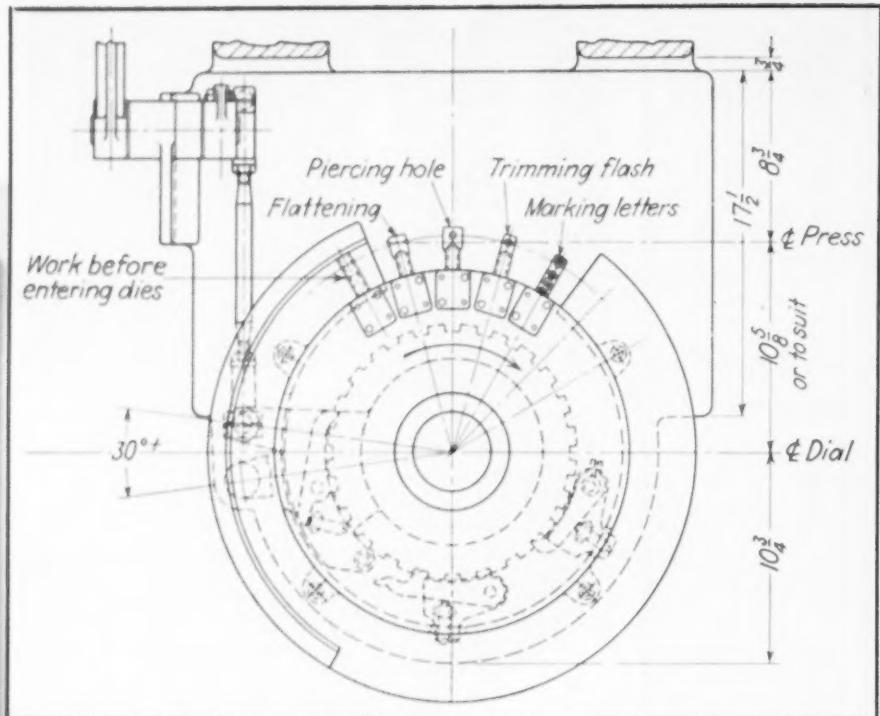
Drawing of typical underfed dial showing necessary dimensions for mounting on Niagara No. A 3/16 press. Illustration courtesy F. J. Littell Machine Company.
